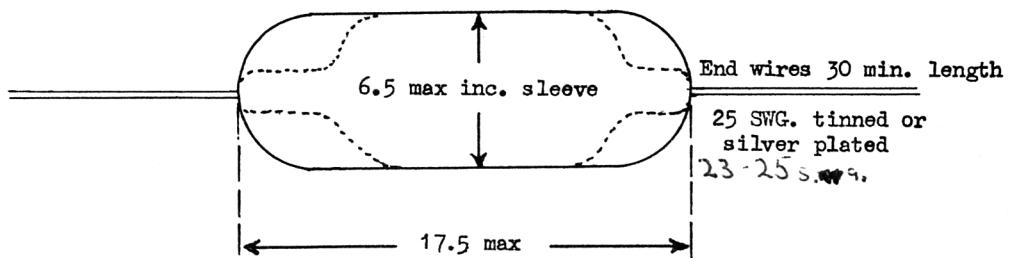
DIMENSIONAL OUTLINE DRAWING
